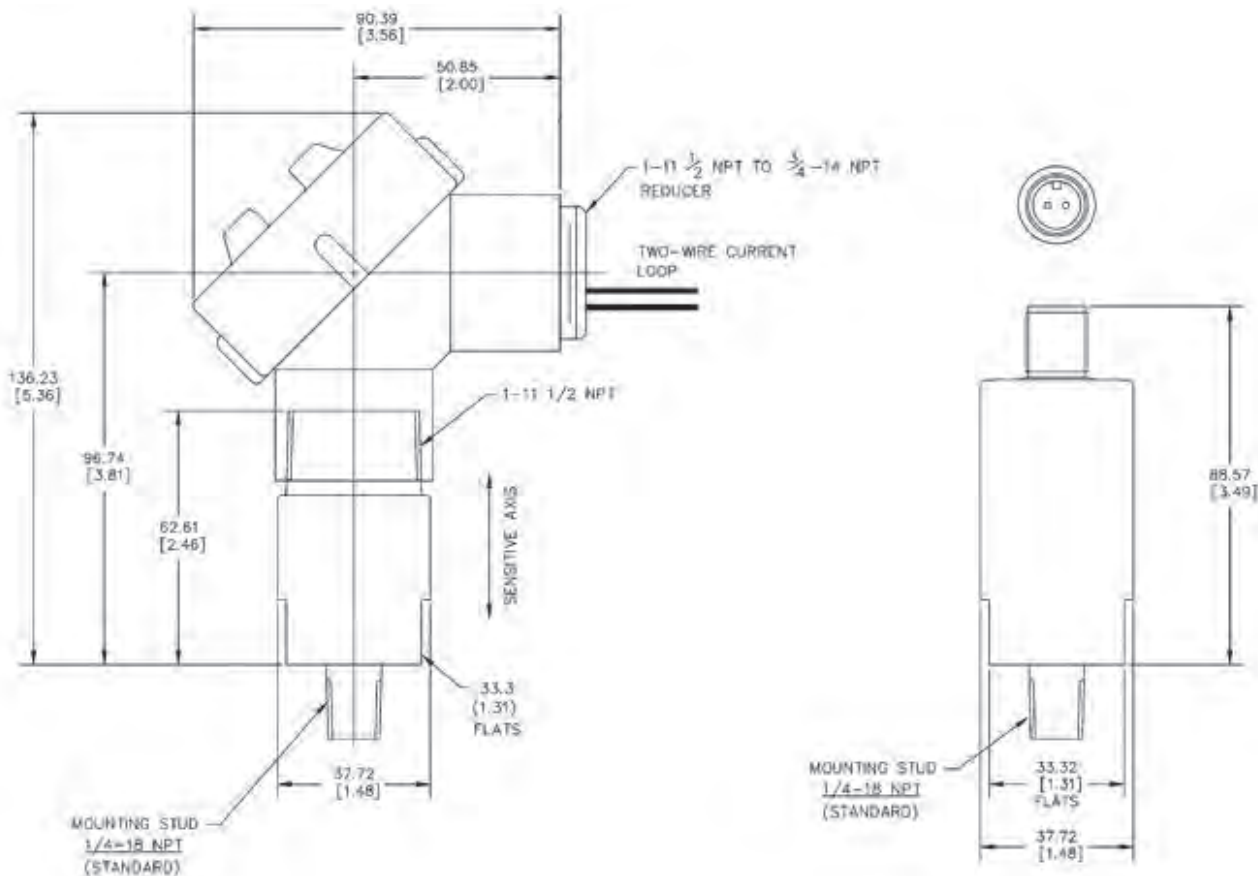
Outline dimensions of the ST5484E (all versions except MIL-Style Connector). Dimensions in mm [inches]. Optional* 8200-001 conduit elbow shown installed.
